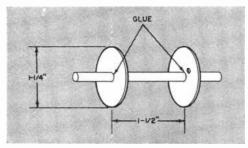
The coil form used for a reed switch must be fabricated from nonmagnetic materials. Dimensions shown in this drawing are typical for the DR series of General Electric's dry reed switches. The inner diameter of coil form core should be ½".
